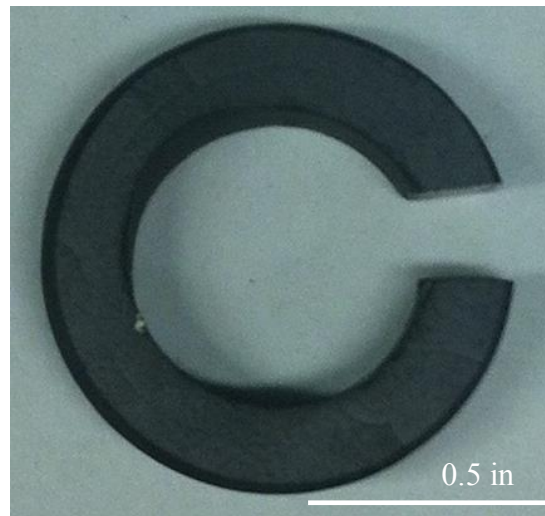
Final sintered C-shaped ZrB_2 sample.
